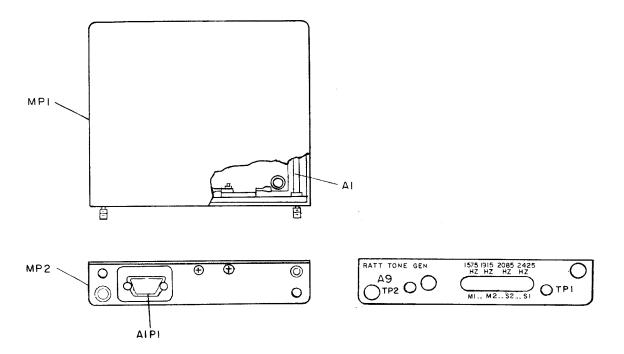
RATT Tone Generator Assembly A2A9, Component Locations
